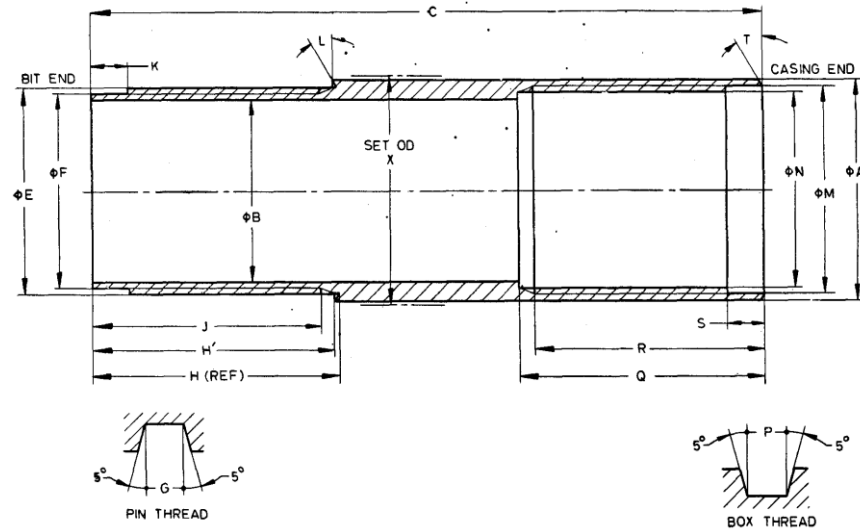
'W' DESIGN FLUSH JOINTED CASINGS — CASING REAMING SHELL
